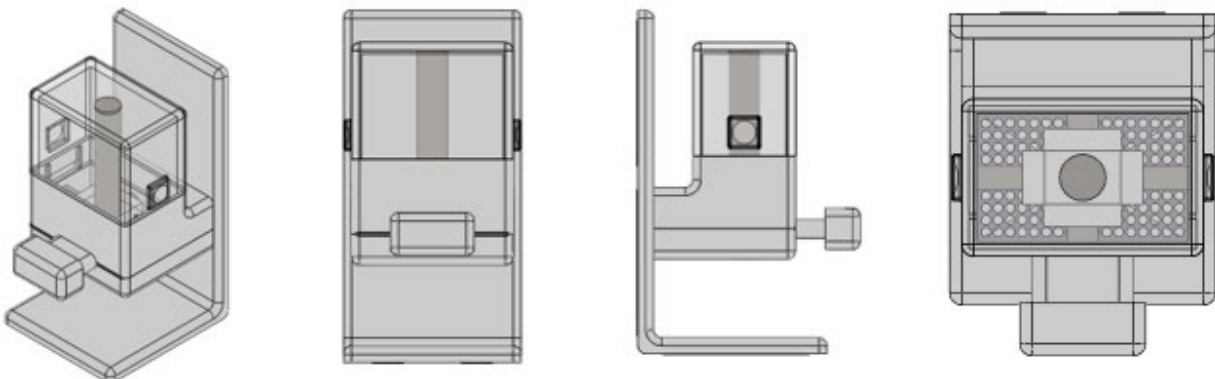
Final Product Design (from Left to Right: Isometric View, Front View, Side View, Top View)
